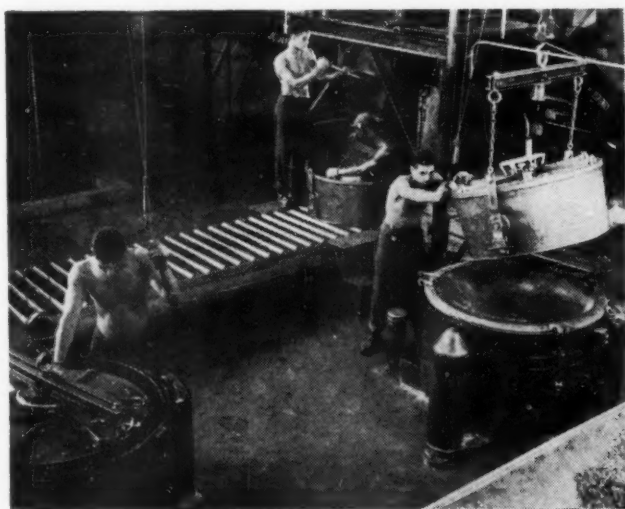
VIEW IN THE CHIP HOUSE, CENTRIFUGING THE CUTTING OIL FROM CHIPS
